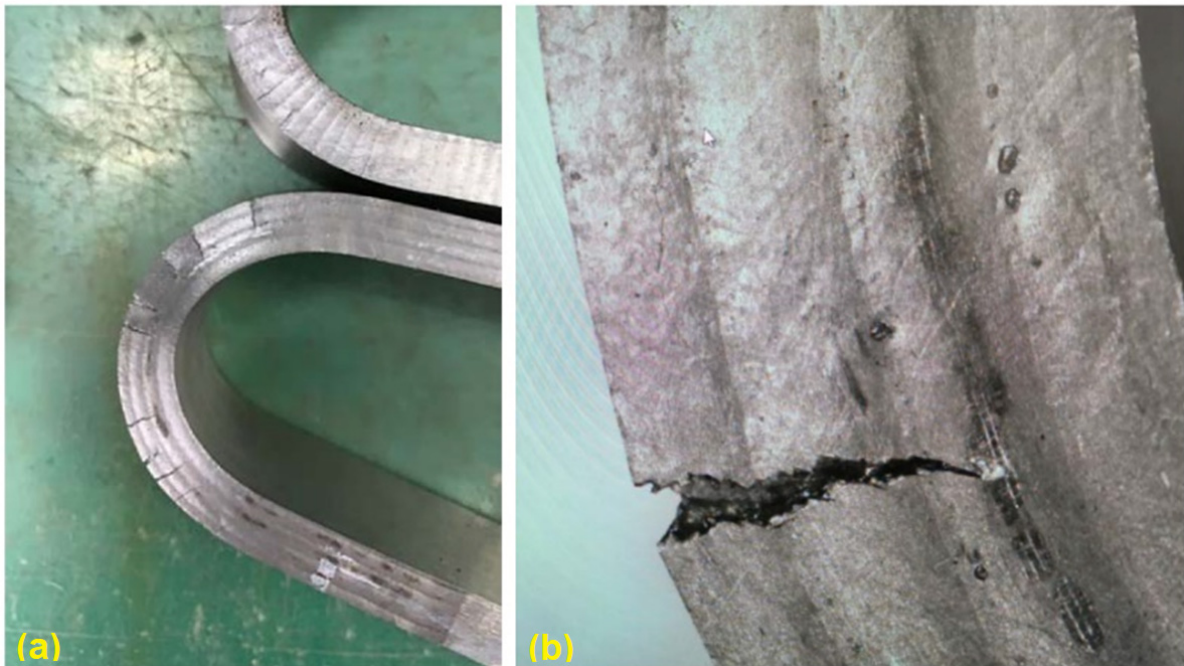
Cracks after side bending tests: test sample (a) and cracks (b).
